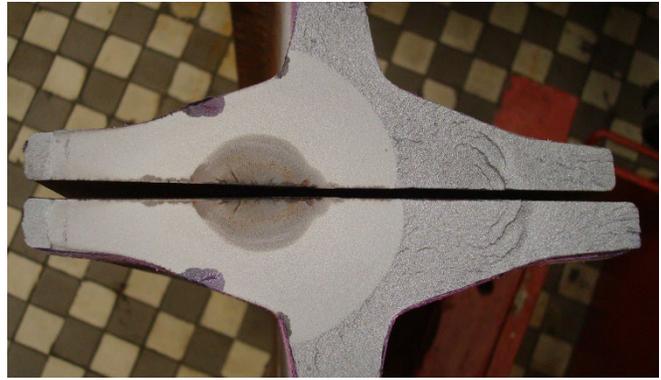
Fatigue crack of a flash butt welded joint of R350HT grade rail (source: author)
